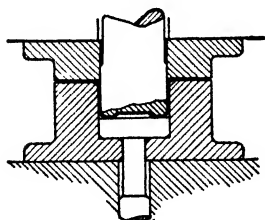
A double-action press die for work with a flange or a bottom forming operation.
